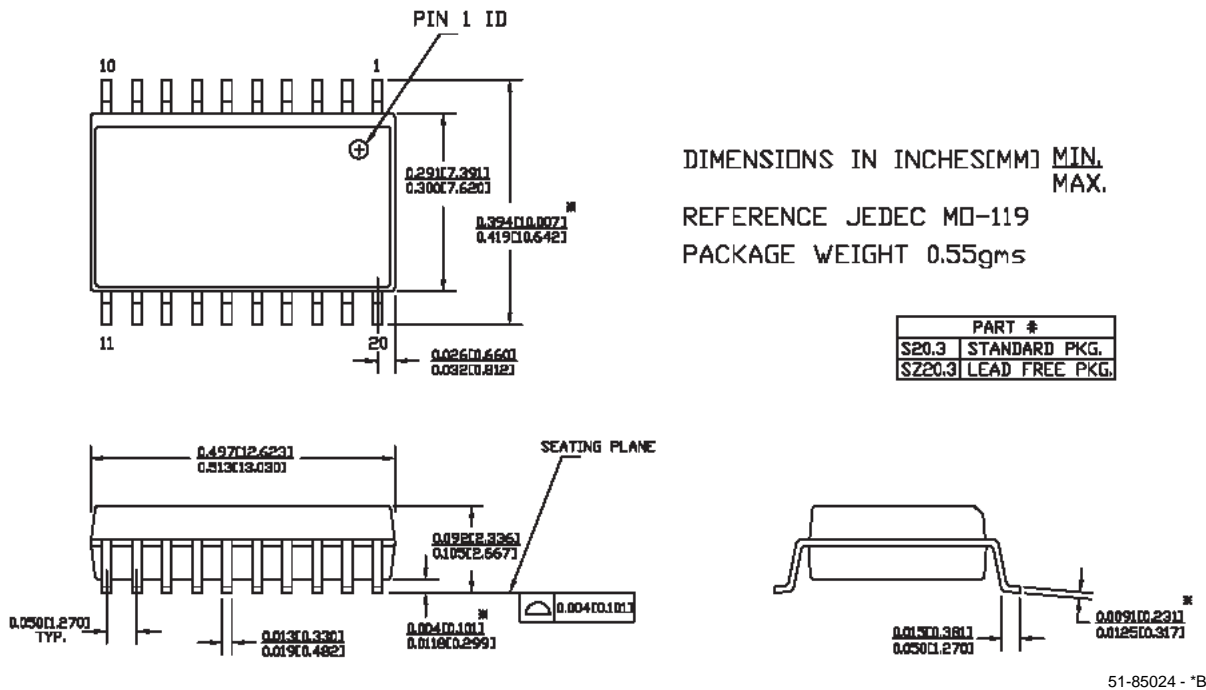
20-Lead (300-Mil) Molded SOIC
